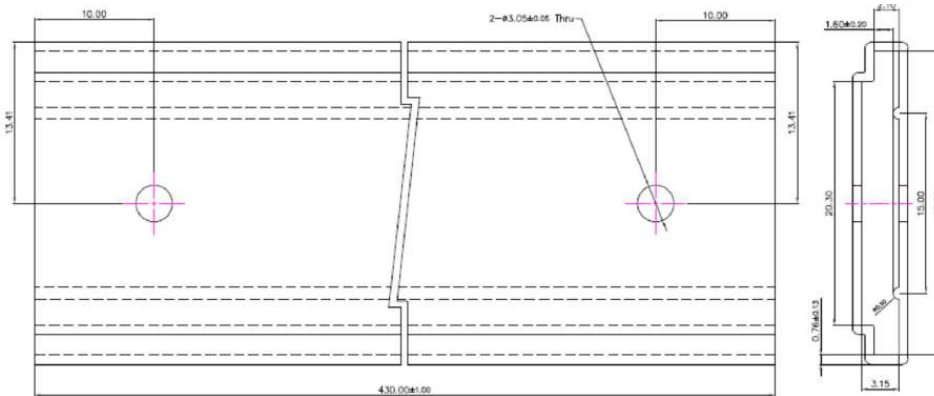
Tube dimensions for L2C5-xxxx1205F13P0 and L2C5-xxxx1208F15P0 and L2C5-xxxx1210F15P0.
